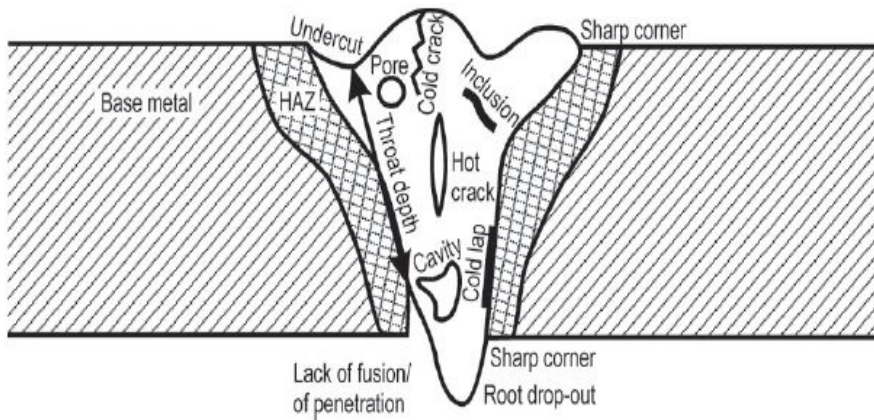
Cross section of a laser weld with different kinds of defects that could appear
